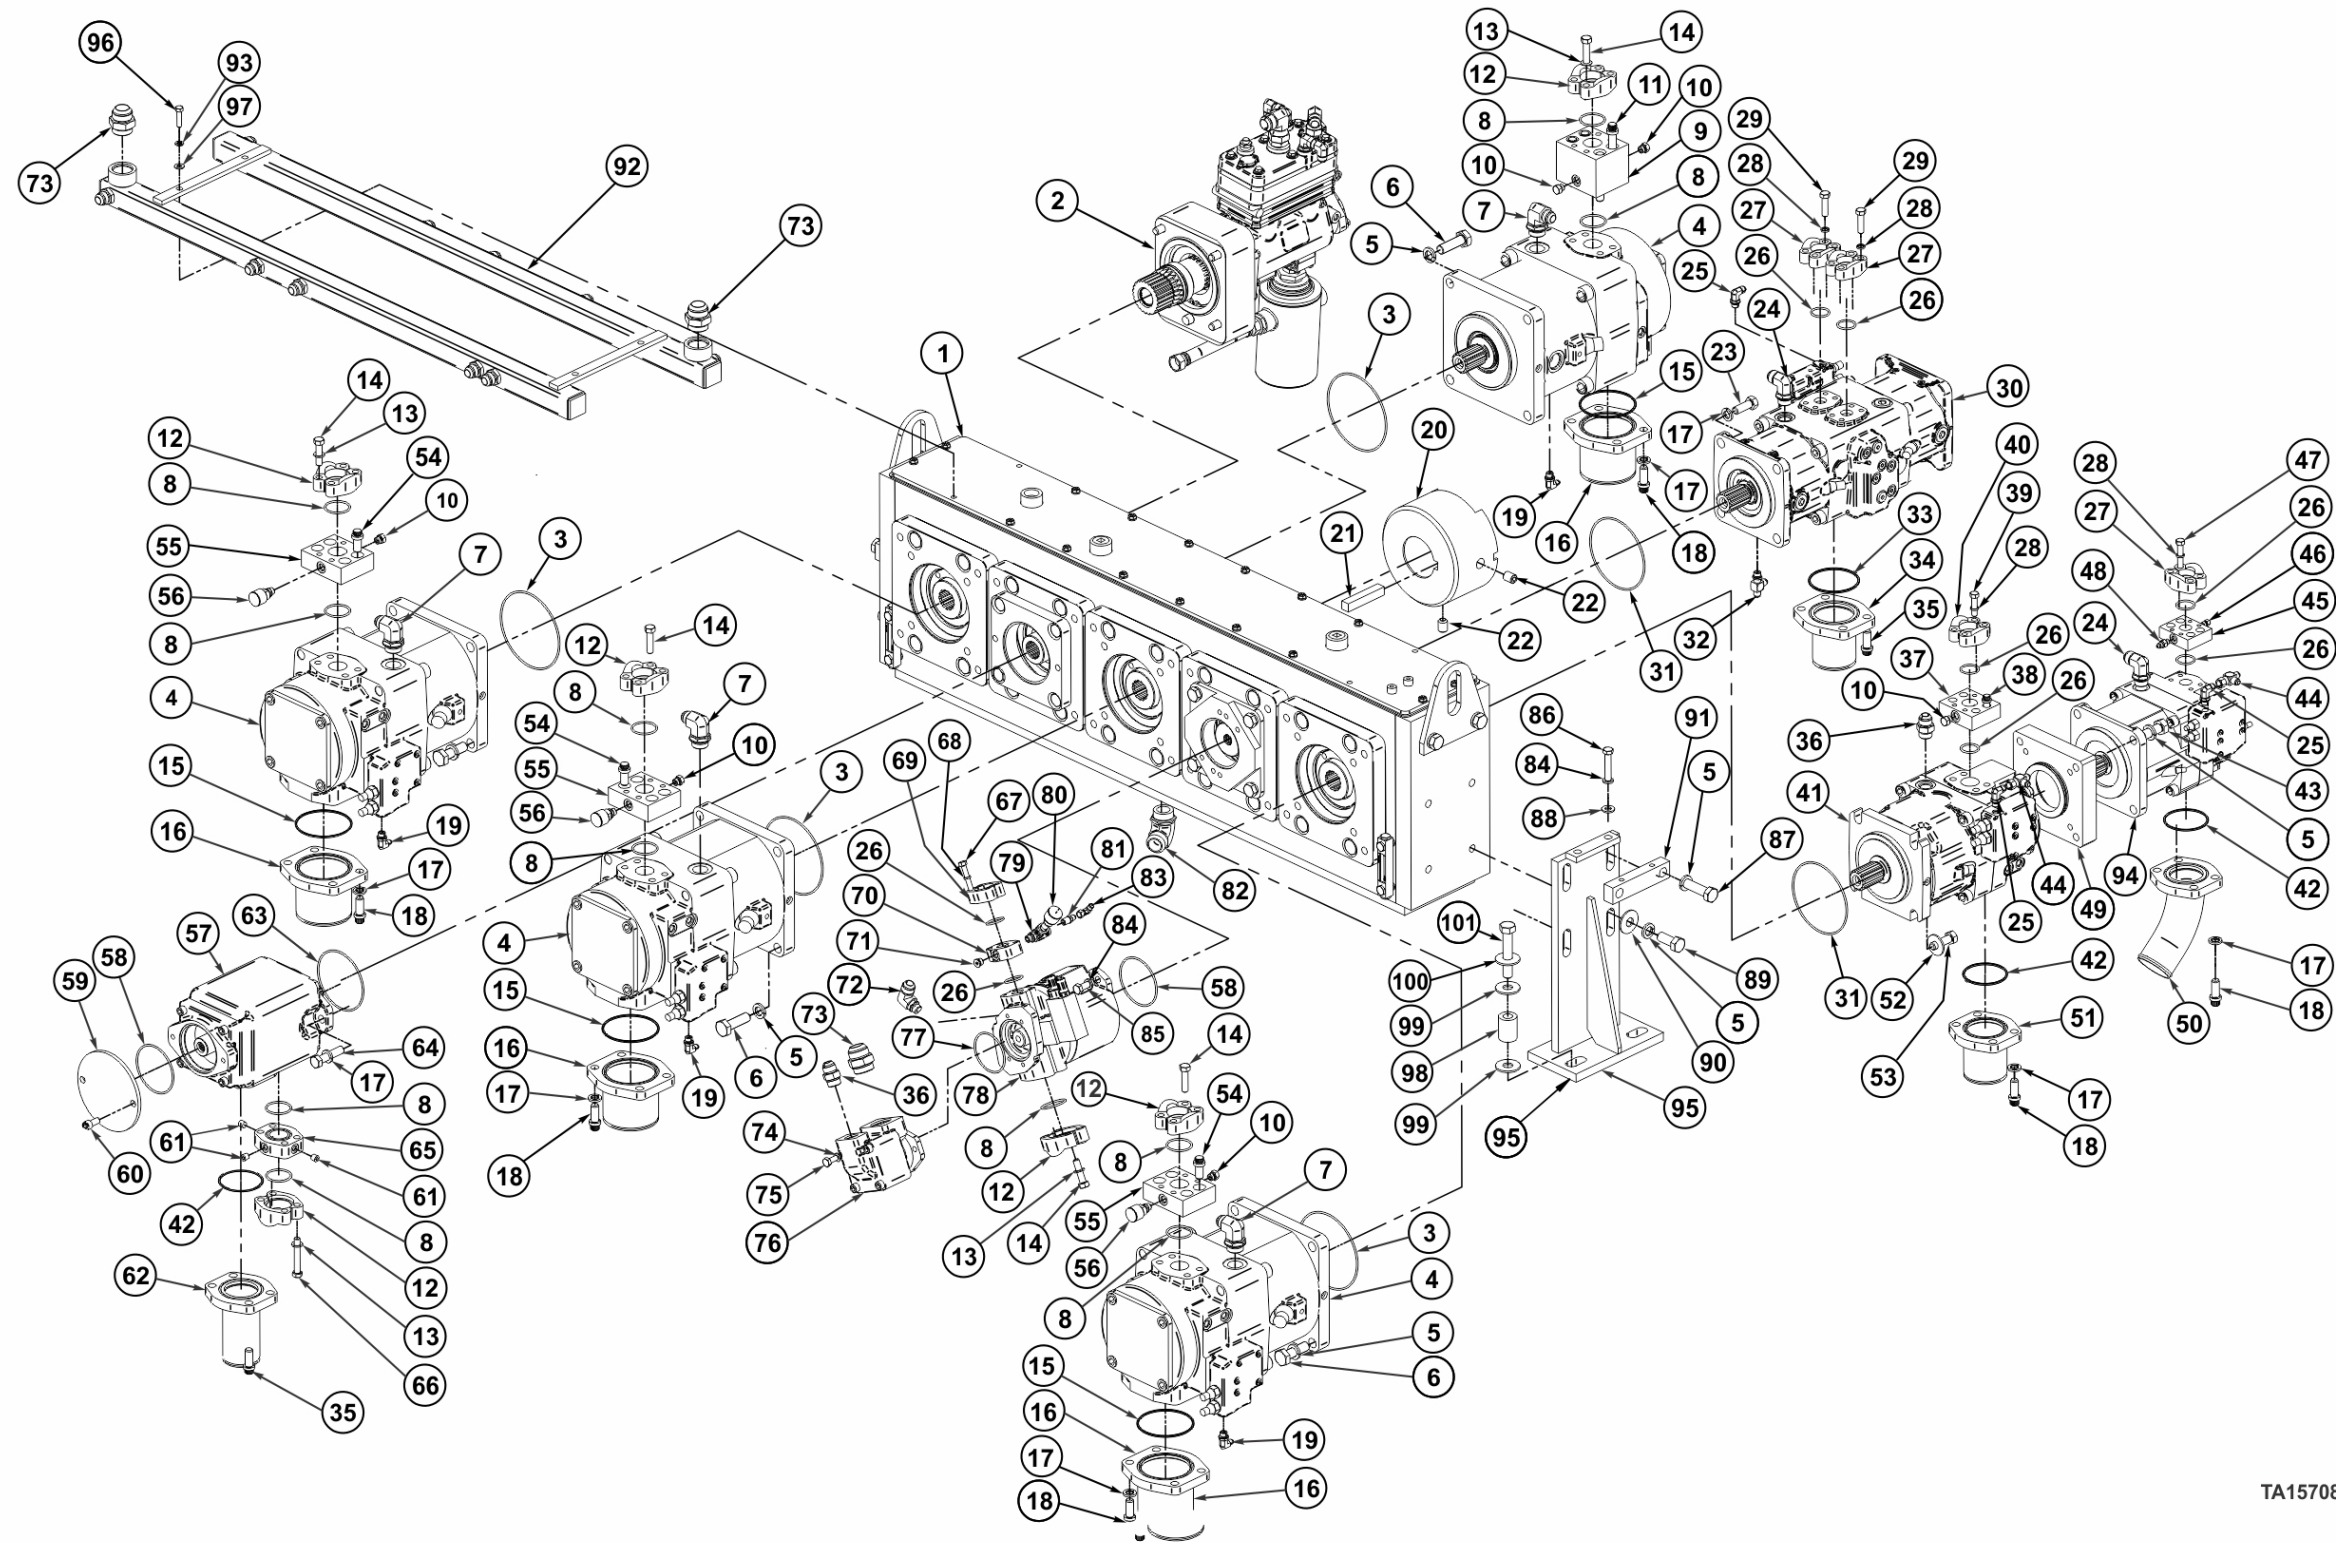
HPD gearbox and pumps Tier 1 engine (typical)
